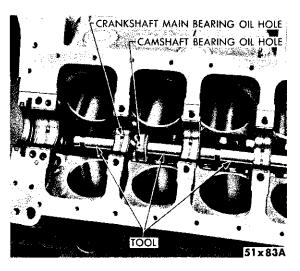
Installing Camshaft Bearing Shells Using Tool C-3034
